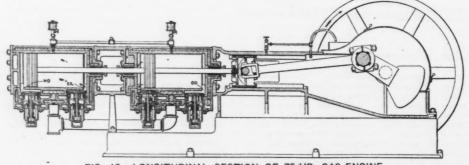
LONGITUDINAL SECTION OF 75-HP. GAS ENGINE.
